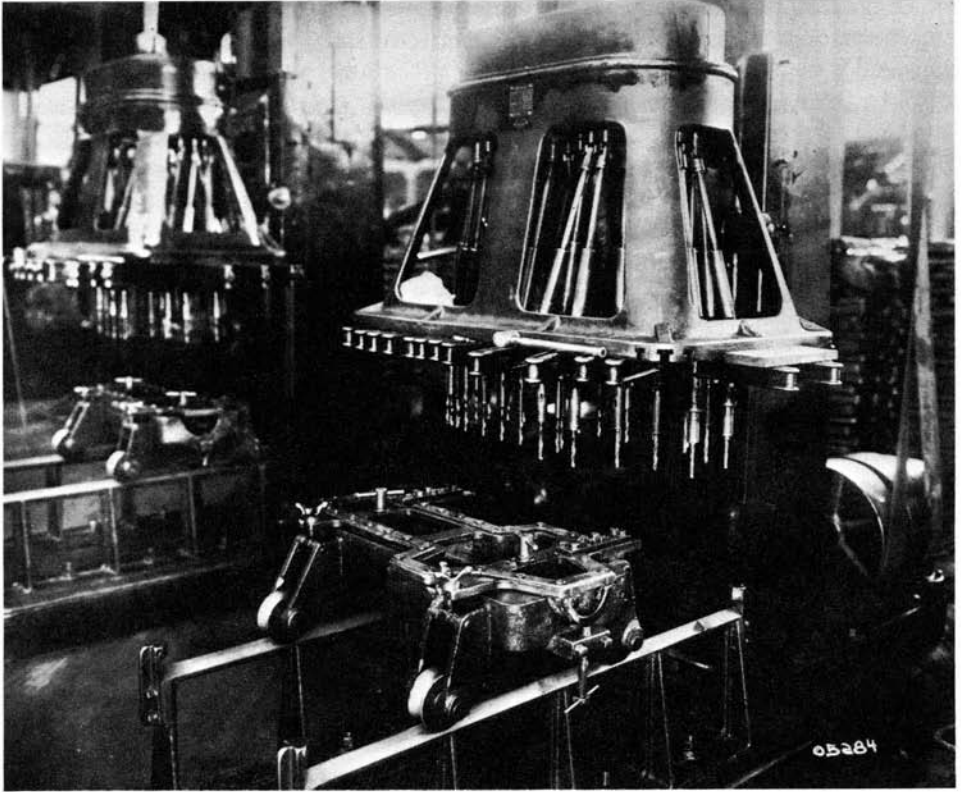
Quick-Change Fixture for Crankcase Drilling, 1913. This photograph is one of many examples that Fred Colvin used to illustrate the way Ford machine tool designers had built speed into manufacturing operations at Highland Park. The crankcase was quickly loaded into the fixture and then the entire assembly was rolled under the multiple spindle drill press. (Henry Ford Museum, The Edison Institute. Neg. No. 0-6342.)
